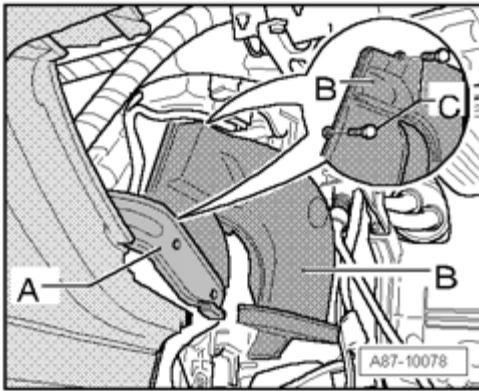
Identifying Instrument Panel, Bolts, And Footwell Vent
